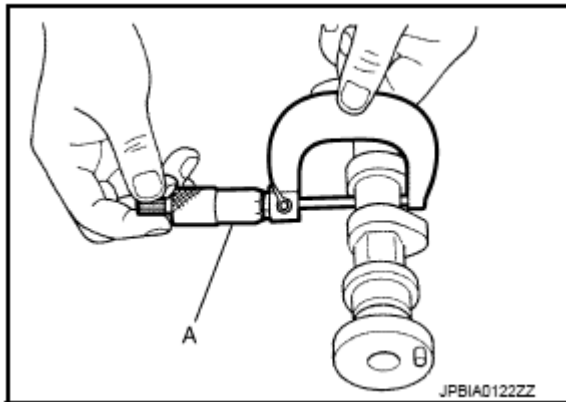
Measuring Outer Diameter Of Camshaft Journal Using Micrometer
